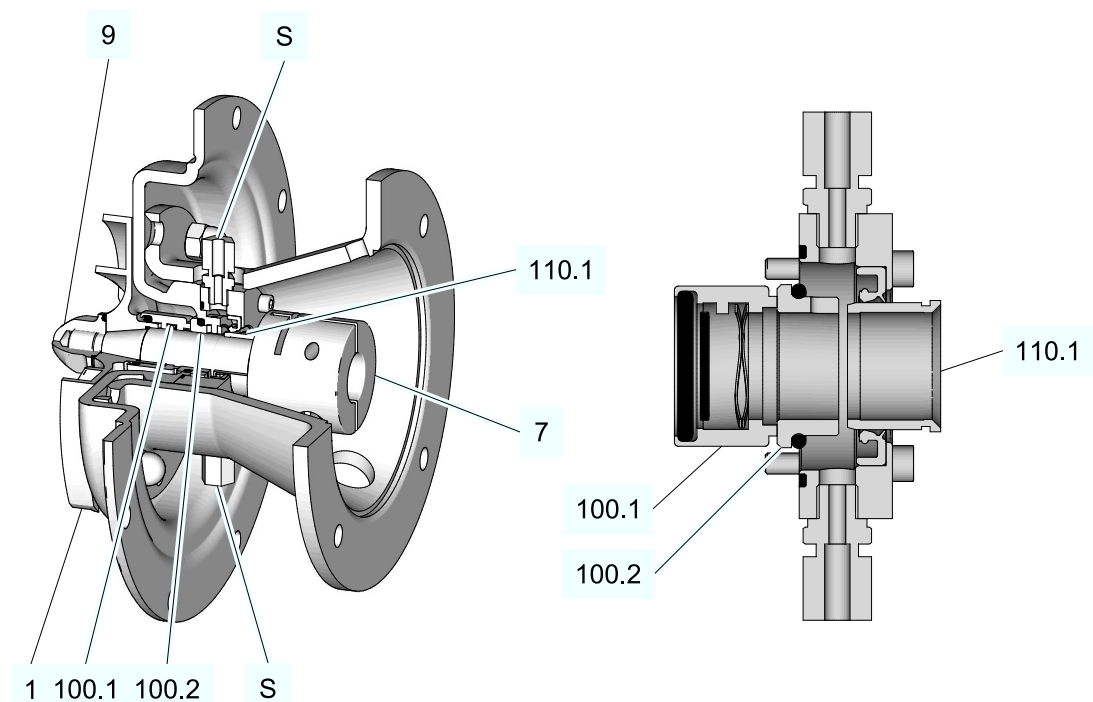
Single-acting slide-ring packing, flushed QU, with detail drawing
